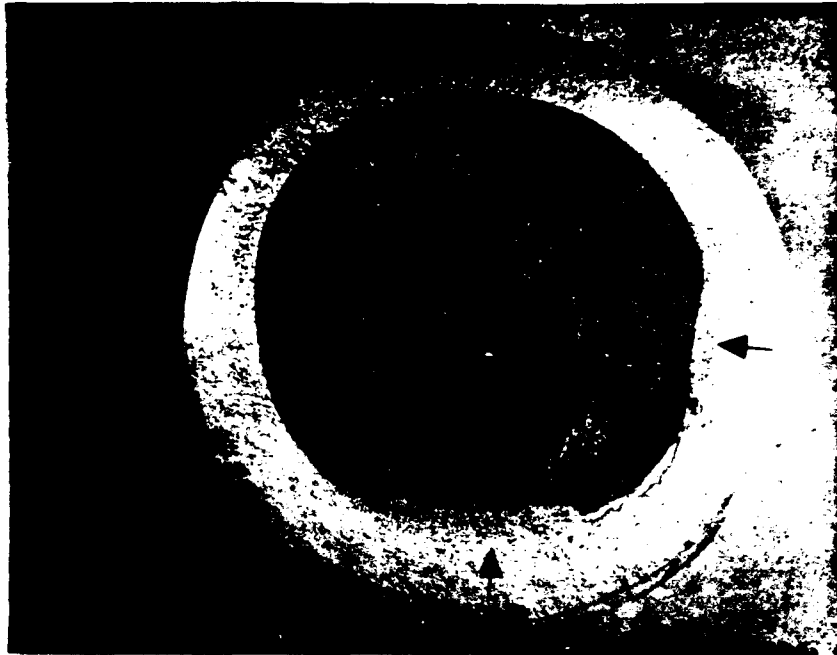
Fracture surface of fatigue testing mandrel, post-cleaned condition.
